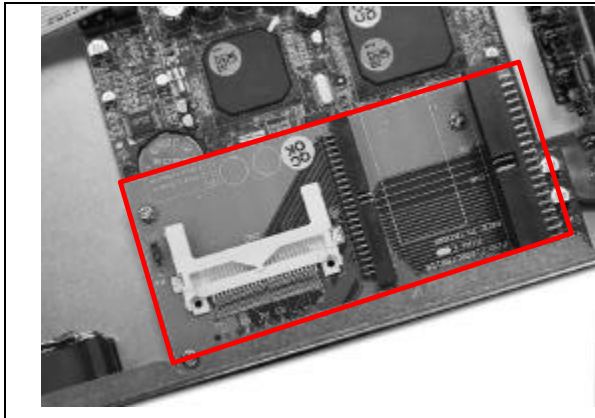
Place the hard disk drive over the PPAP-100W CPU card, then fix the four round-head screws in four plastic hex-stand-off holes
